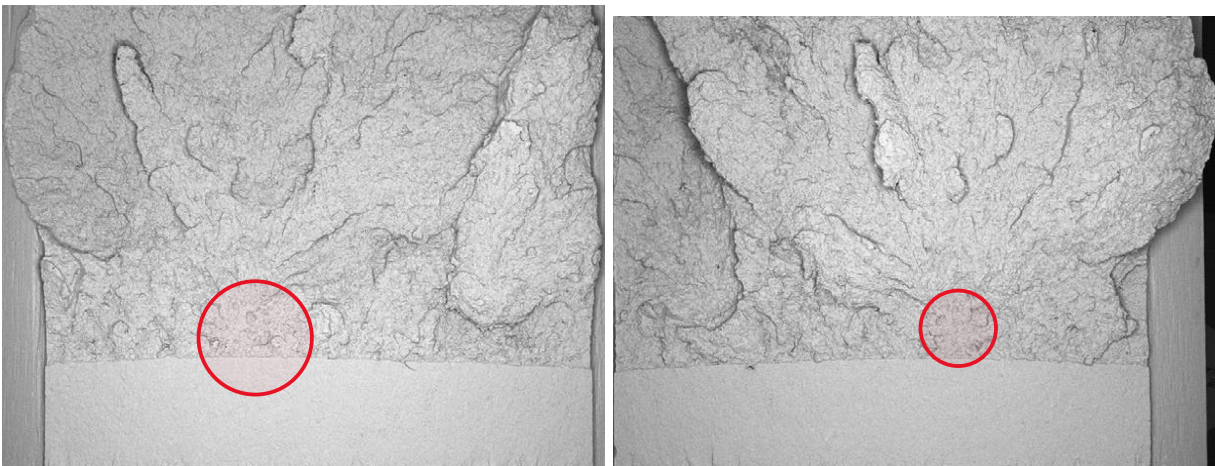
Left and right fracture surface of unirradiated 25 mm C(T) specimen B1C.7, showing predominantly cleavage fracture. The primary cleavage fracture initiation region is marked by a red circle. The test temperature was -30°C and the fracture toughness 148.1 MPa√m which explains the considerable roughness of the fracture surface. Cleavage initiation occurs in a region without special features. There are isolated Al₂O₃ inclusions located in the fatigue crack growth region, but none are identified in the cleavage fracture region. Manganese sulfides present close to the end of the specimen are unrelated to cleavage
